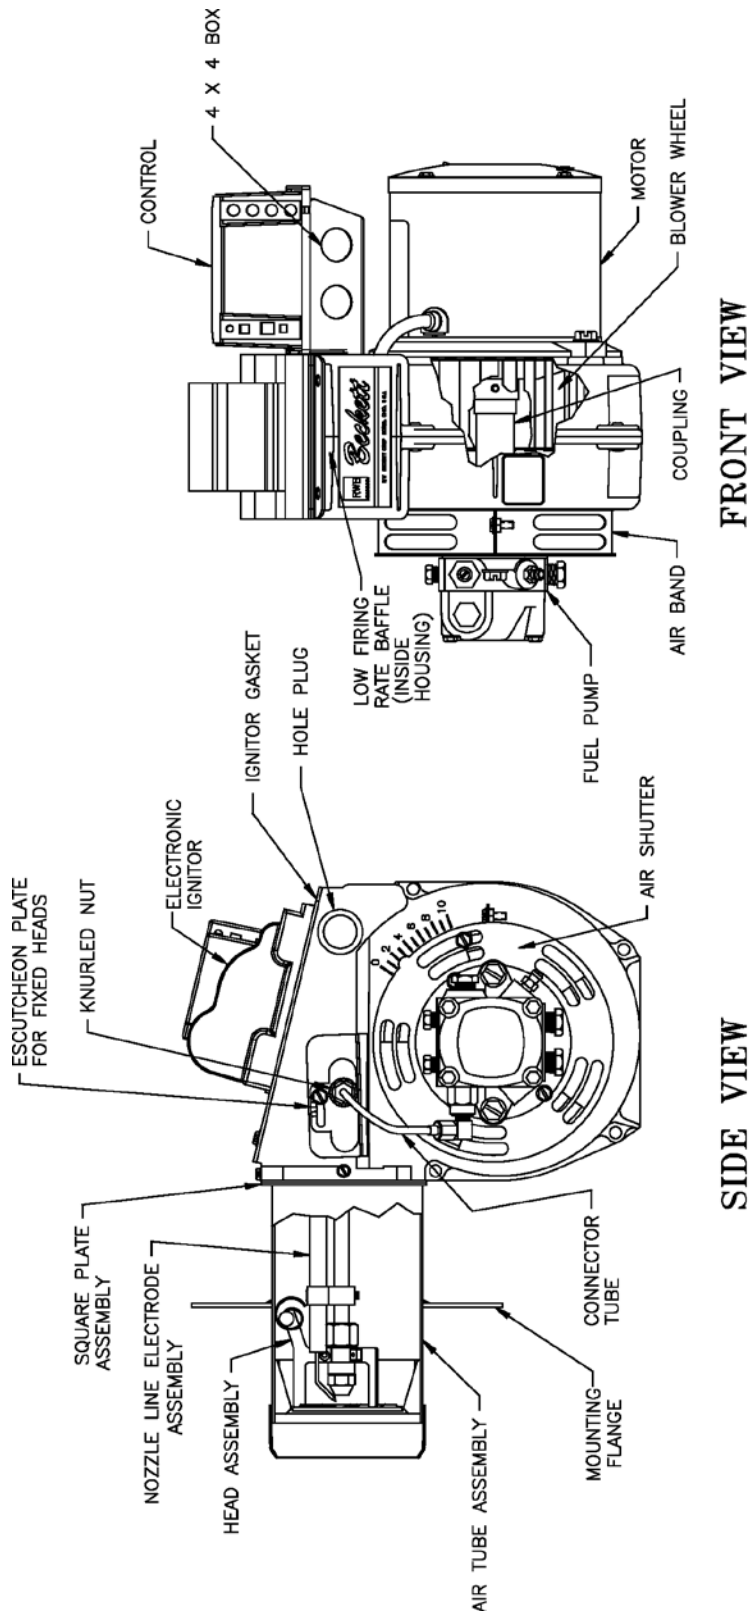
BECKETT AFG OIL BURNER REPAIR PARTS
